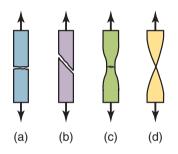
Schematic illustration of the types of fracture in tension: (a) brittle fracture in polycrystalline metals; (b) shear fracture in ductile single crystals—see also Fig. 1.6a; (c) ductile cup-and-cone fracture in polycrystalline metals; (d) complete ductile fracture in polycrystalline metals, with 100% reduction of area.
